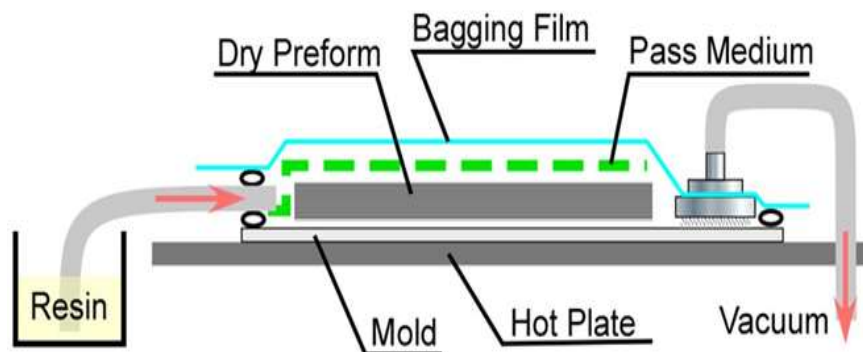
Vacuum-assisted resin transfer molding technique [3].
